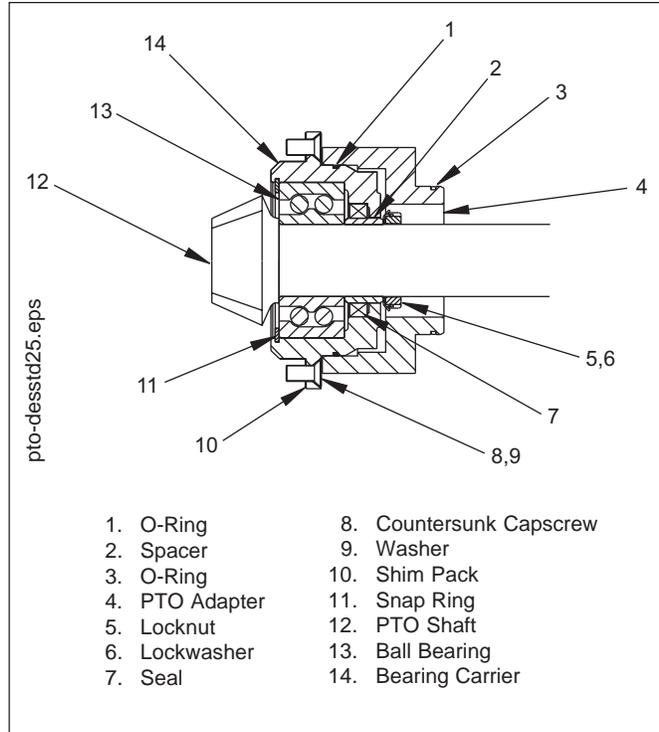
PTO Shaft on W12E for Dresser TD25E/G
